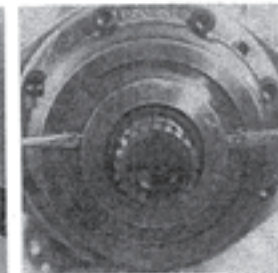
Remove Seal Carrier (Cartridge)
